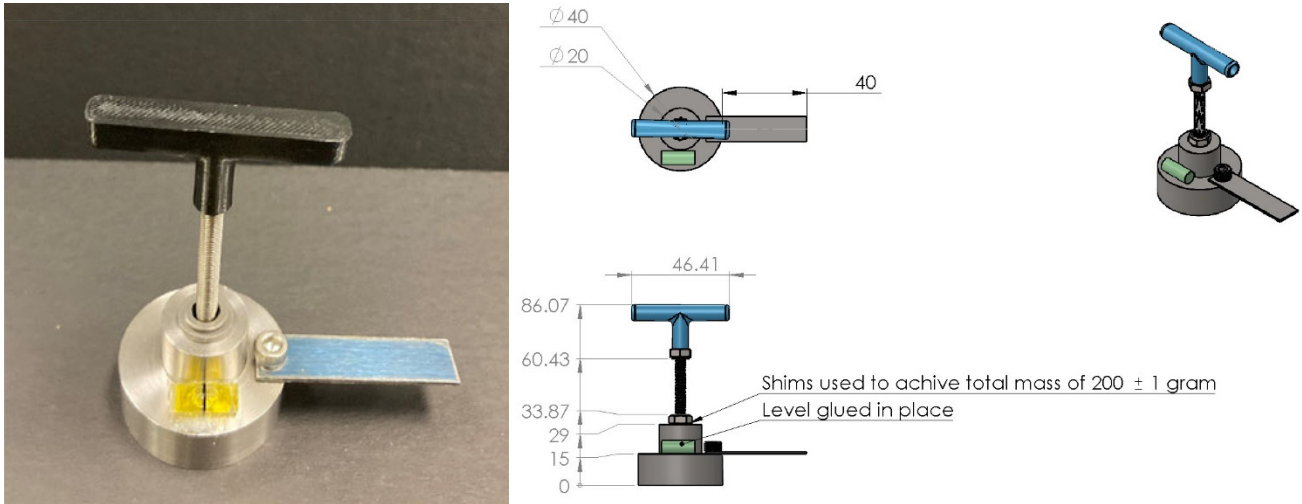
Modified firmness testing apparatus (L) and engineering drawing (R)
